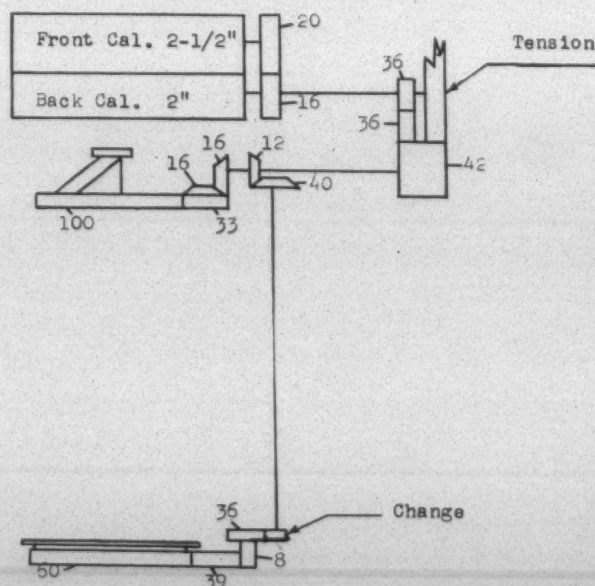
This diagram shows the gearing which controls the number of coils per layer on the conventional drawing frame. The gear marked, "change," is easiest to alter when increasing the coils per layer.
